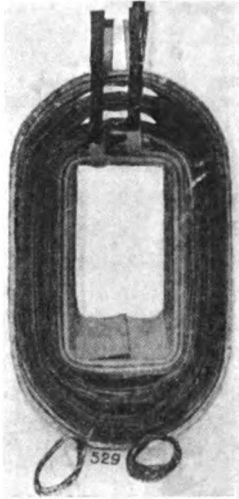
Shell-Type Transformer Cylindrical Coils.
